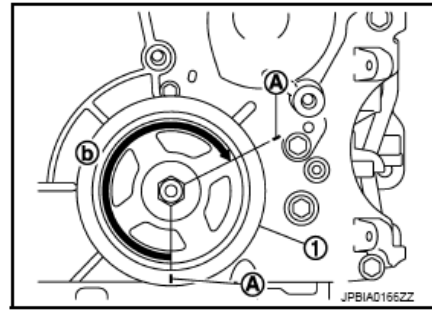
Rotating Crankshaft 240 Degrees Clockwise
